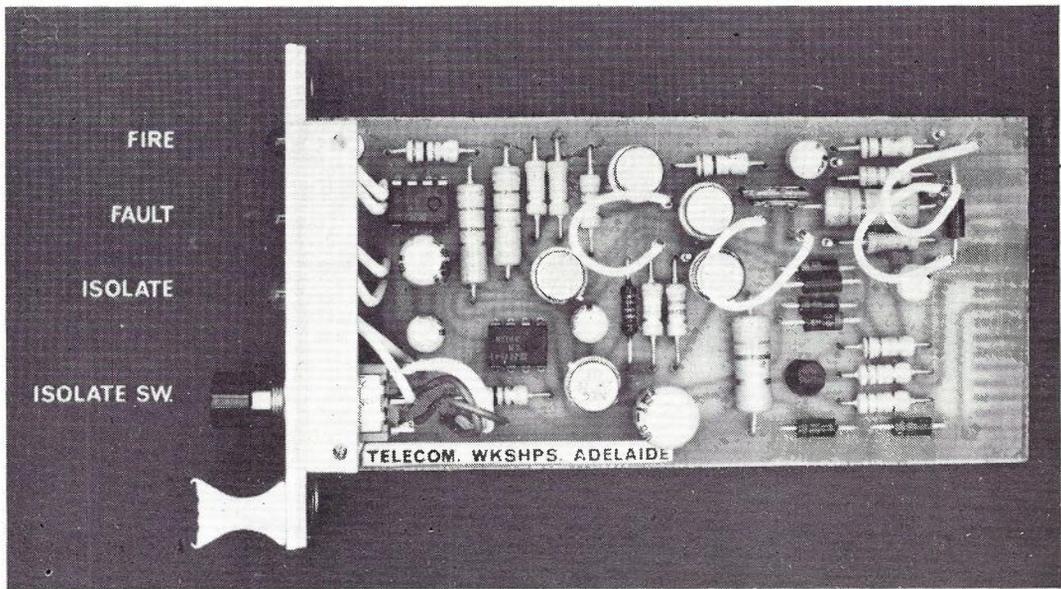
Plug-in Printed Wiring Board; Serving One Building
